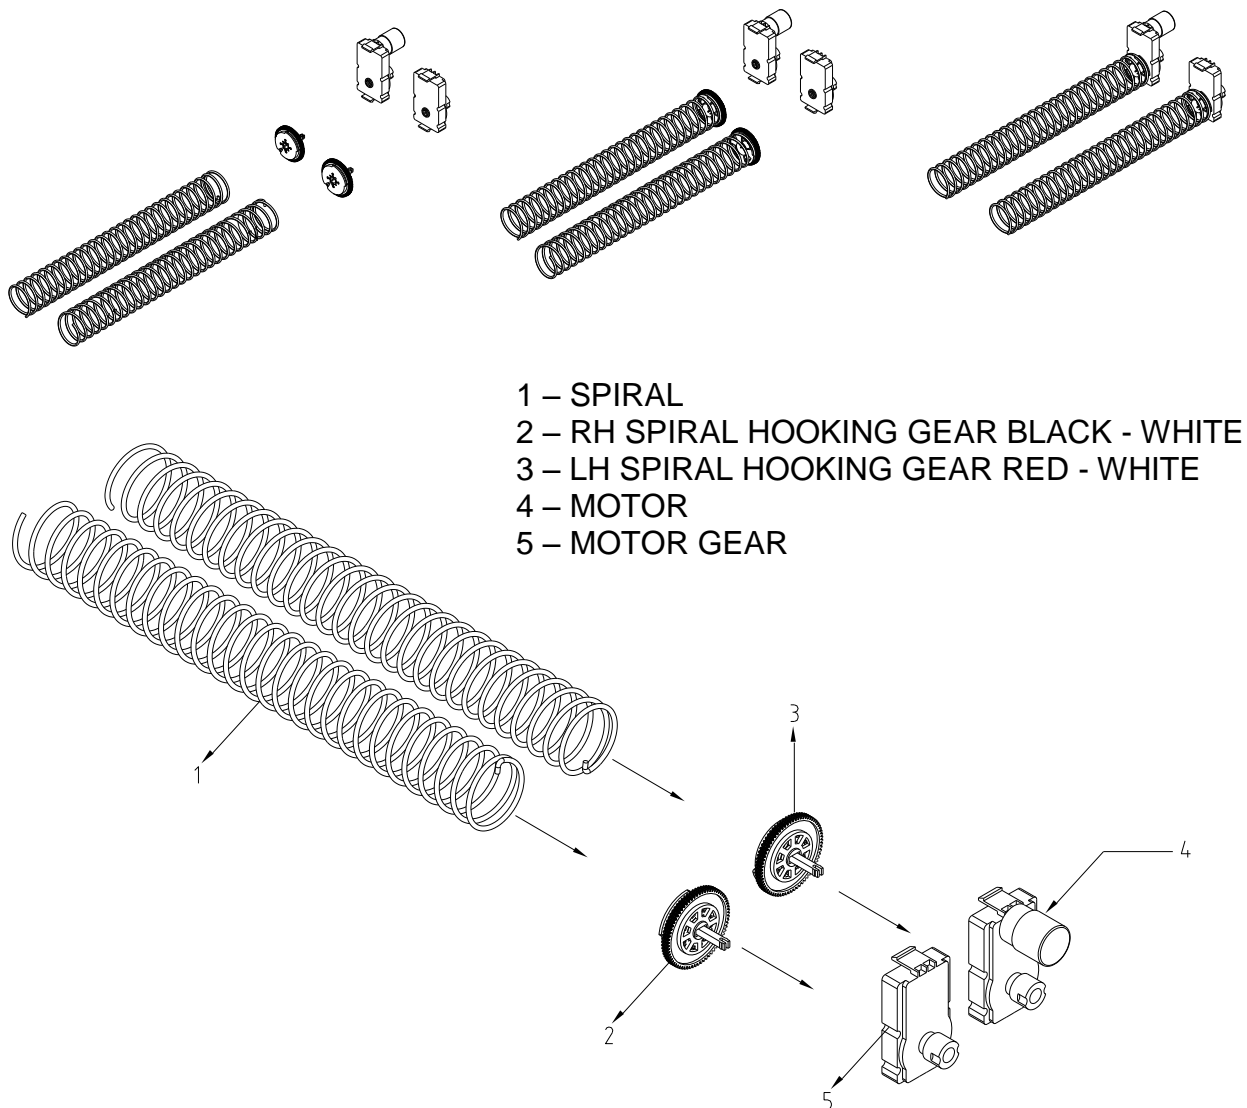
DOUBLE SELECTION SPIRAL ASSEMBLING
